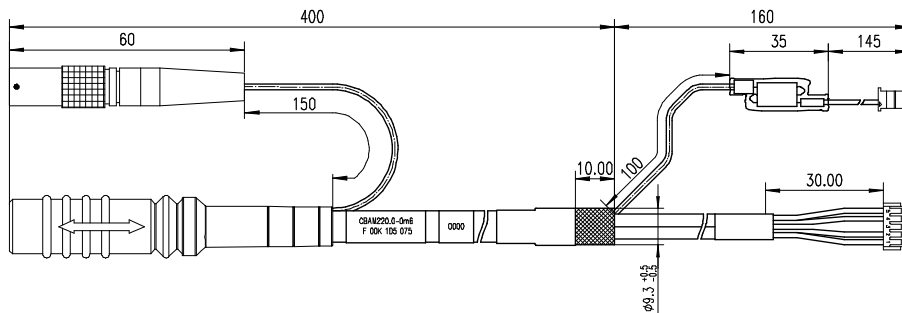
Combined Interface and Power Supply Cable CBAM220
